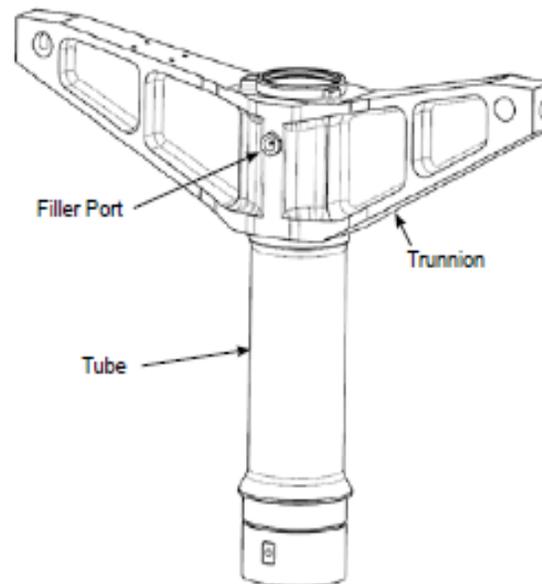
Nose Landing Gear Trunnion Assembly
